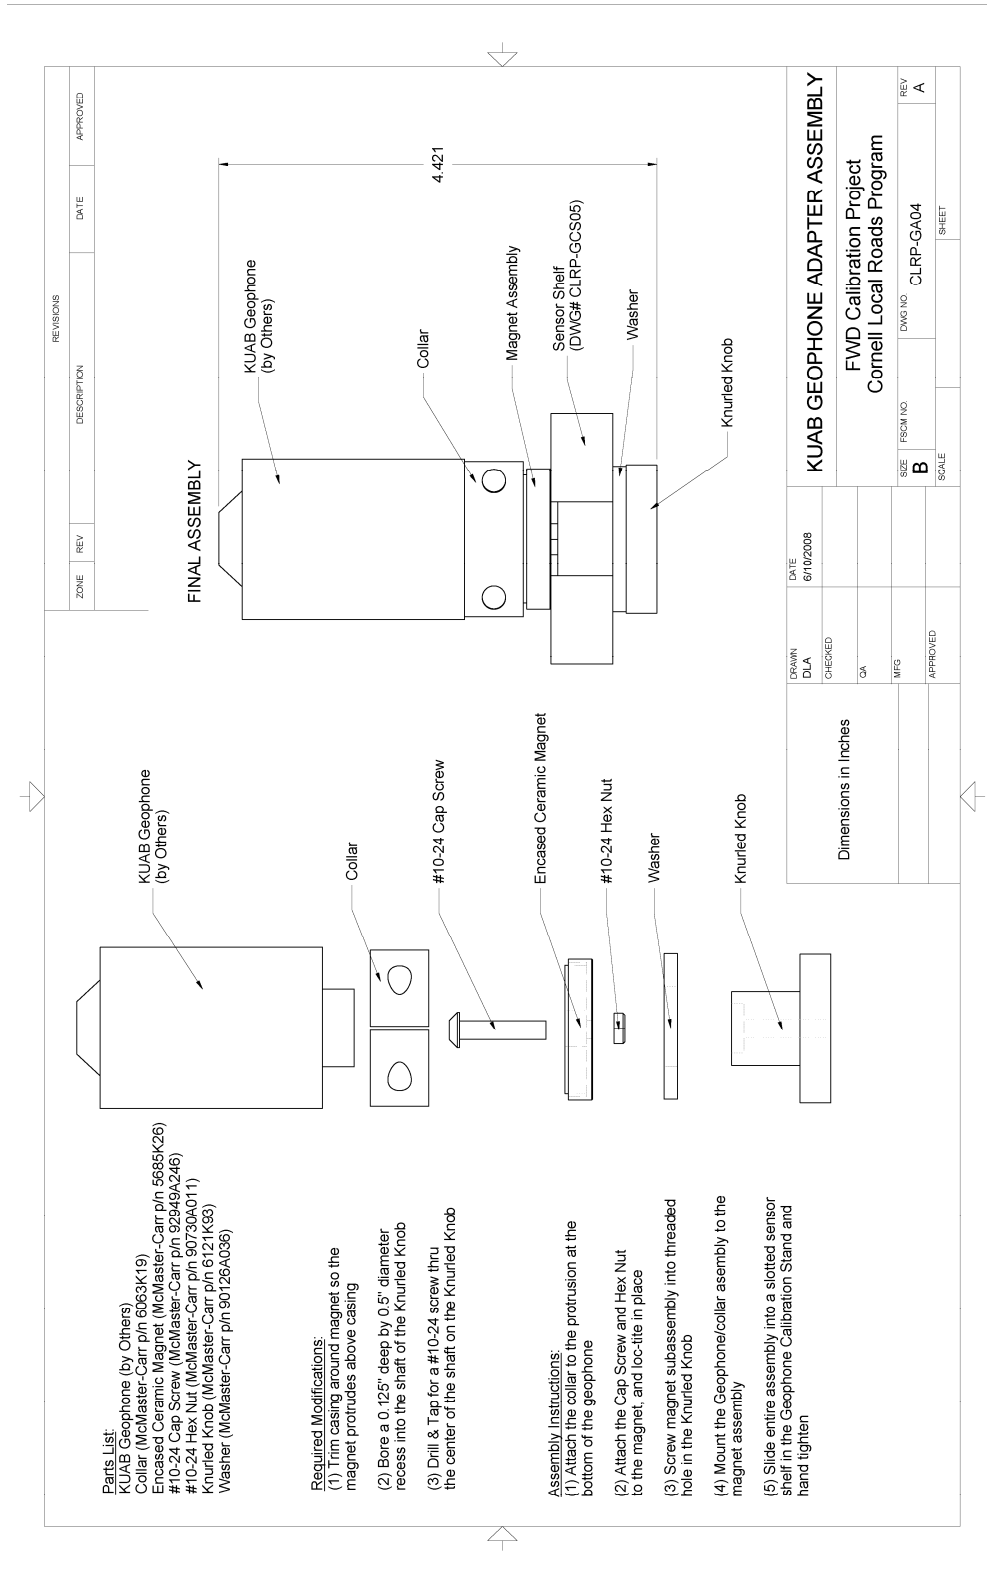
Drawing. CLRP-GA04 KUAB Adapter.
